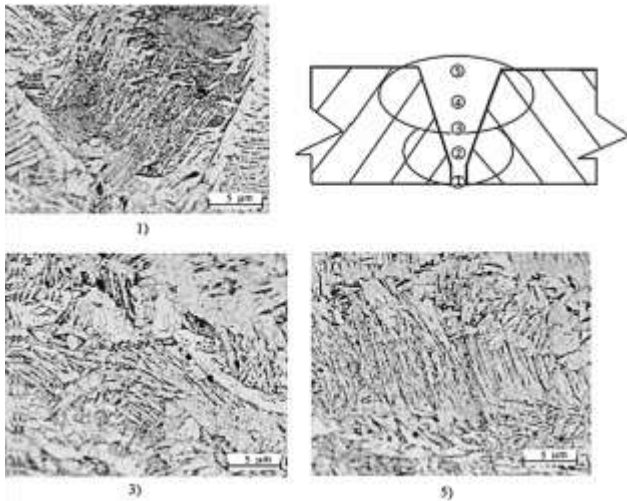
SMAW test piece. Coarse, needle-shaped ferrite structure is seen through-out the whole section
